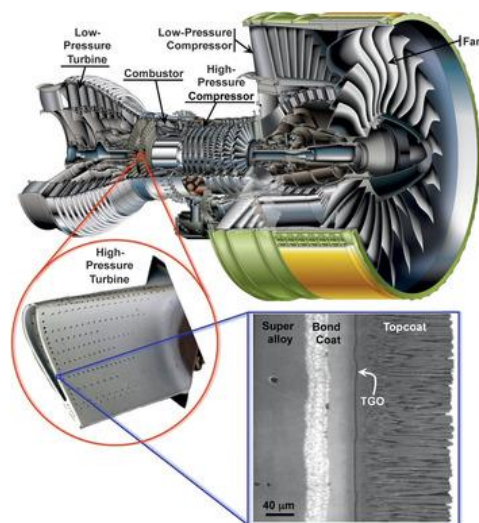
Main elements of a gas turbine engine and a turbine rotor blade with heat-shielding coatings.
